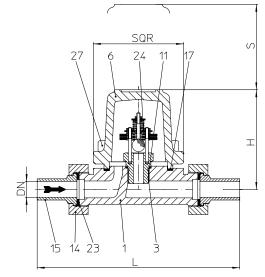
Union with butt weld ends (only PN16)
